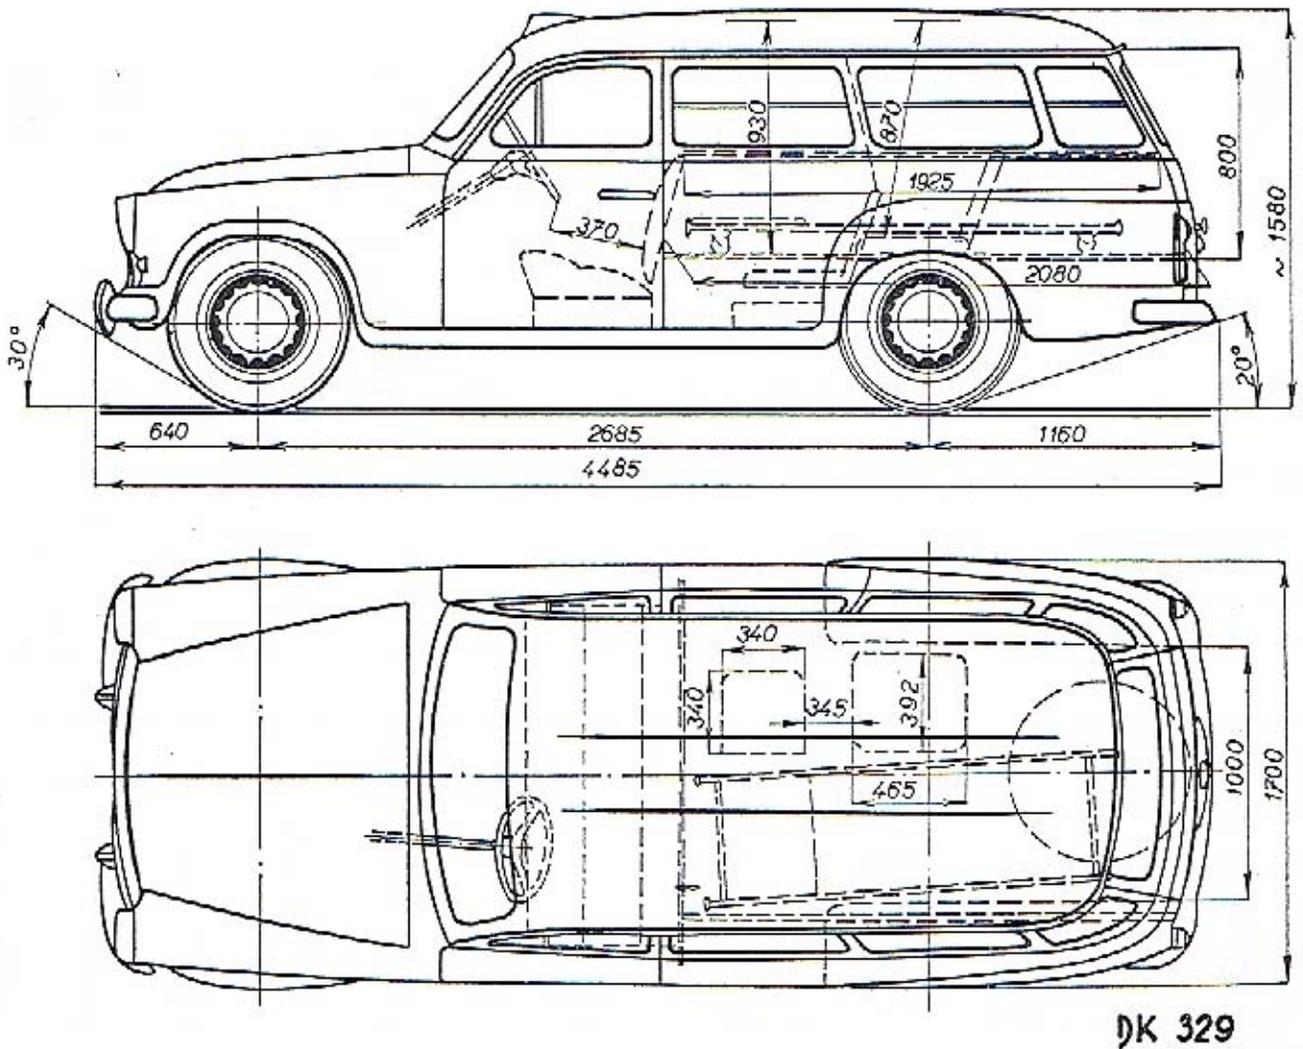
ŠKODA Ambulance Car — Dimensional Drawing
